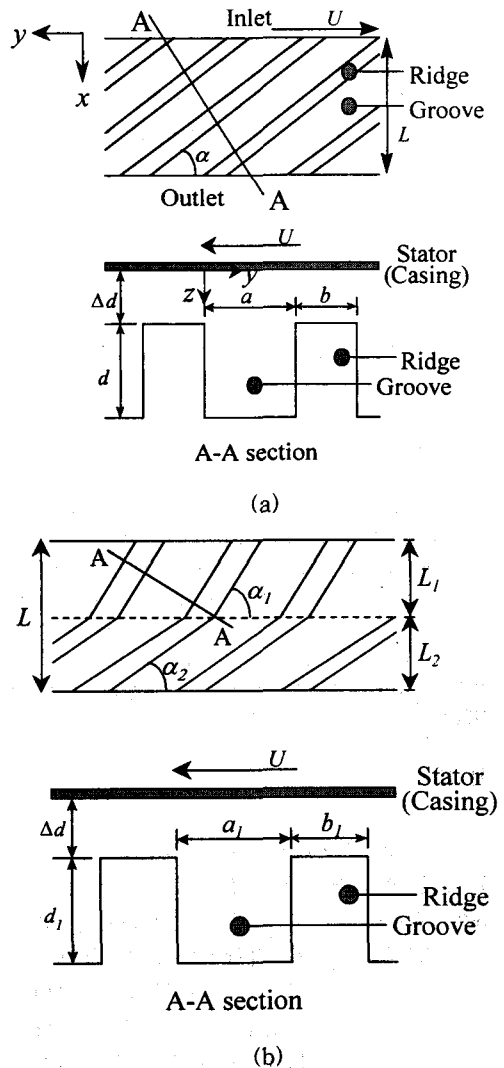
Geometry of helical-type drag pump (Q3D): (a) rotor 1; (b) rotor 2.
